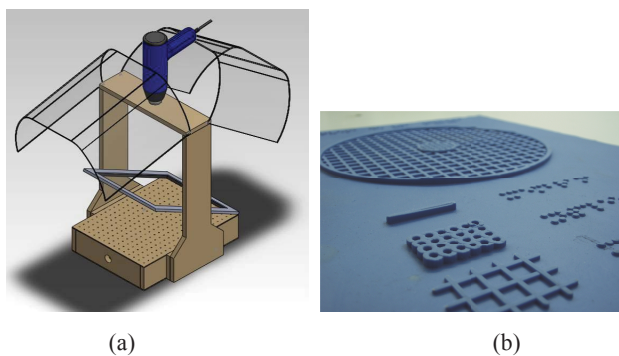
(a) Thermoforming tool and (b) tactile material example.
